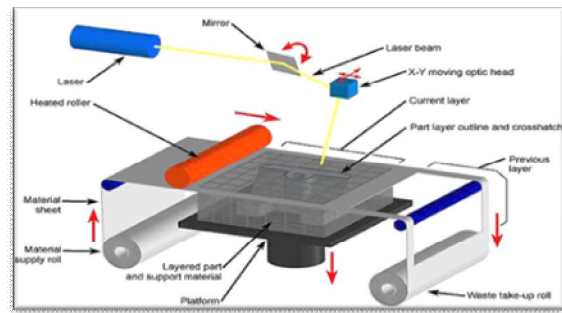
Laminated Object Manufacturing (LOM) [3]
